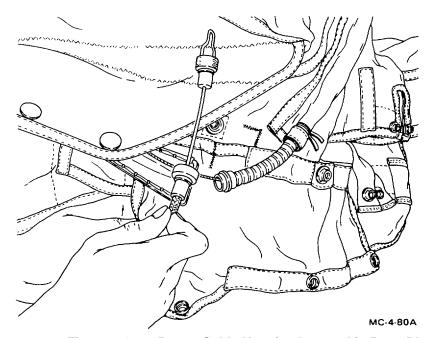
Power Cable Housing Inserted in Base Plate.
